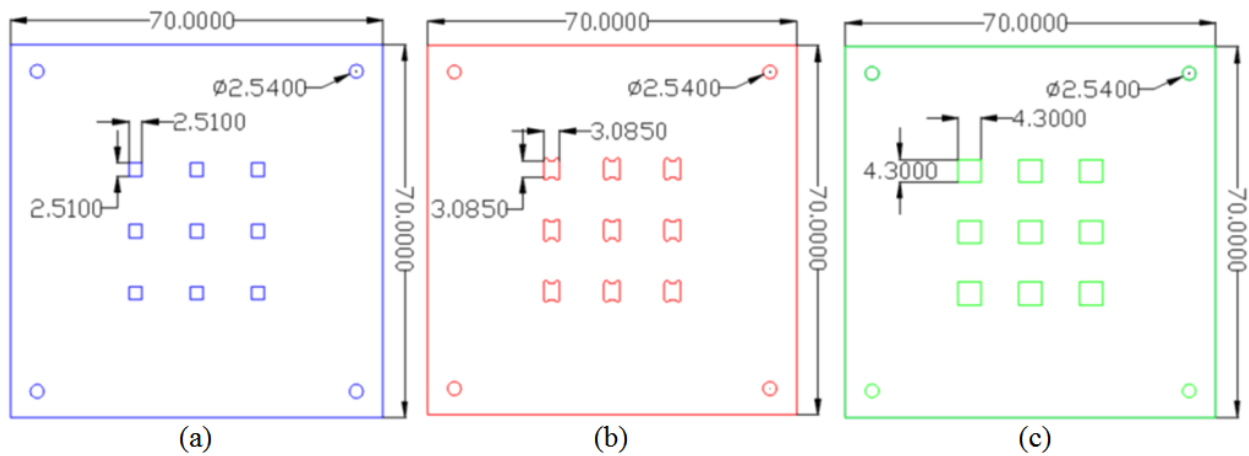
AutoCAD design (a) Kapton mask, (b) bottom Aluminum fixture, (c) top Aluminum fixture for E-beam evaporation on SiC diode
